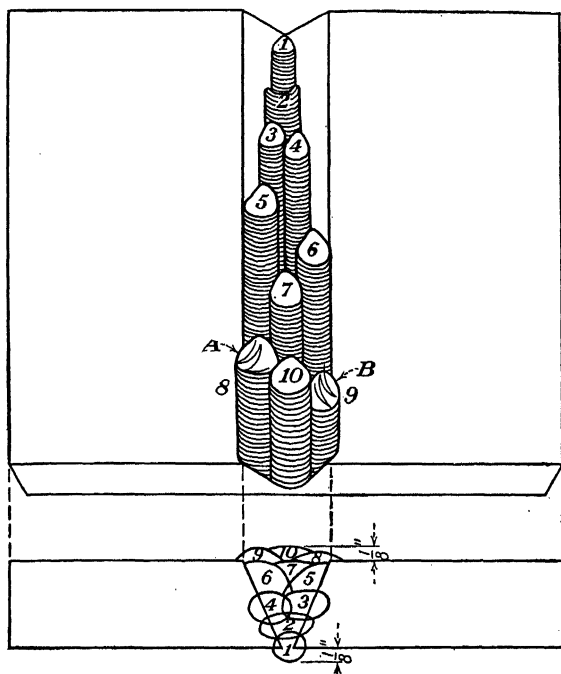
A butt weld. The beads are numbered in their order of deposit. The right- and left-hand J motions A and B are used on the two outside beads to prevent undercutting.
